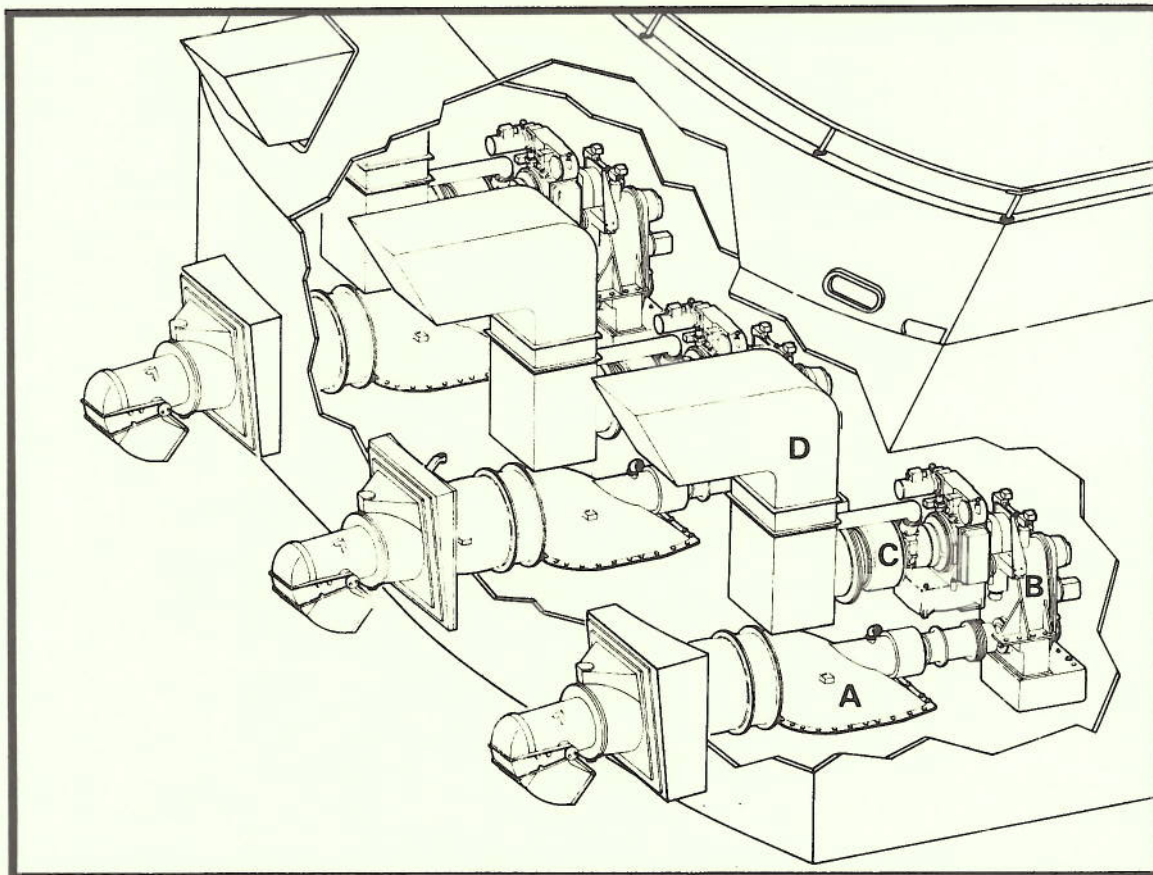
Cutaway View of Turbine Ferry Engine Room
